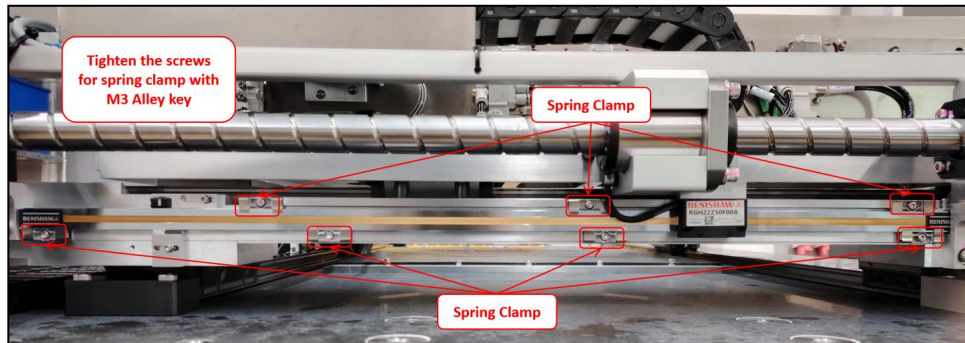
X-Axis glass scale Spring clamp (Sample Image)
